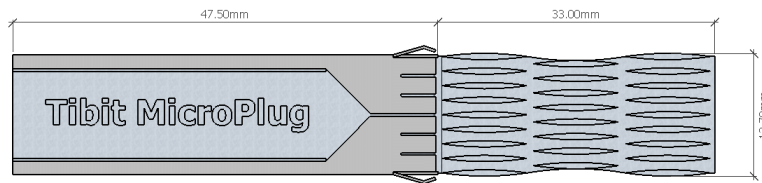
Low pressure heatsink OLT MicroPlug dimensions (top)
